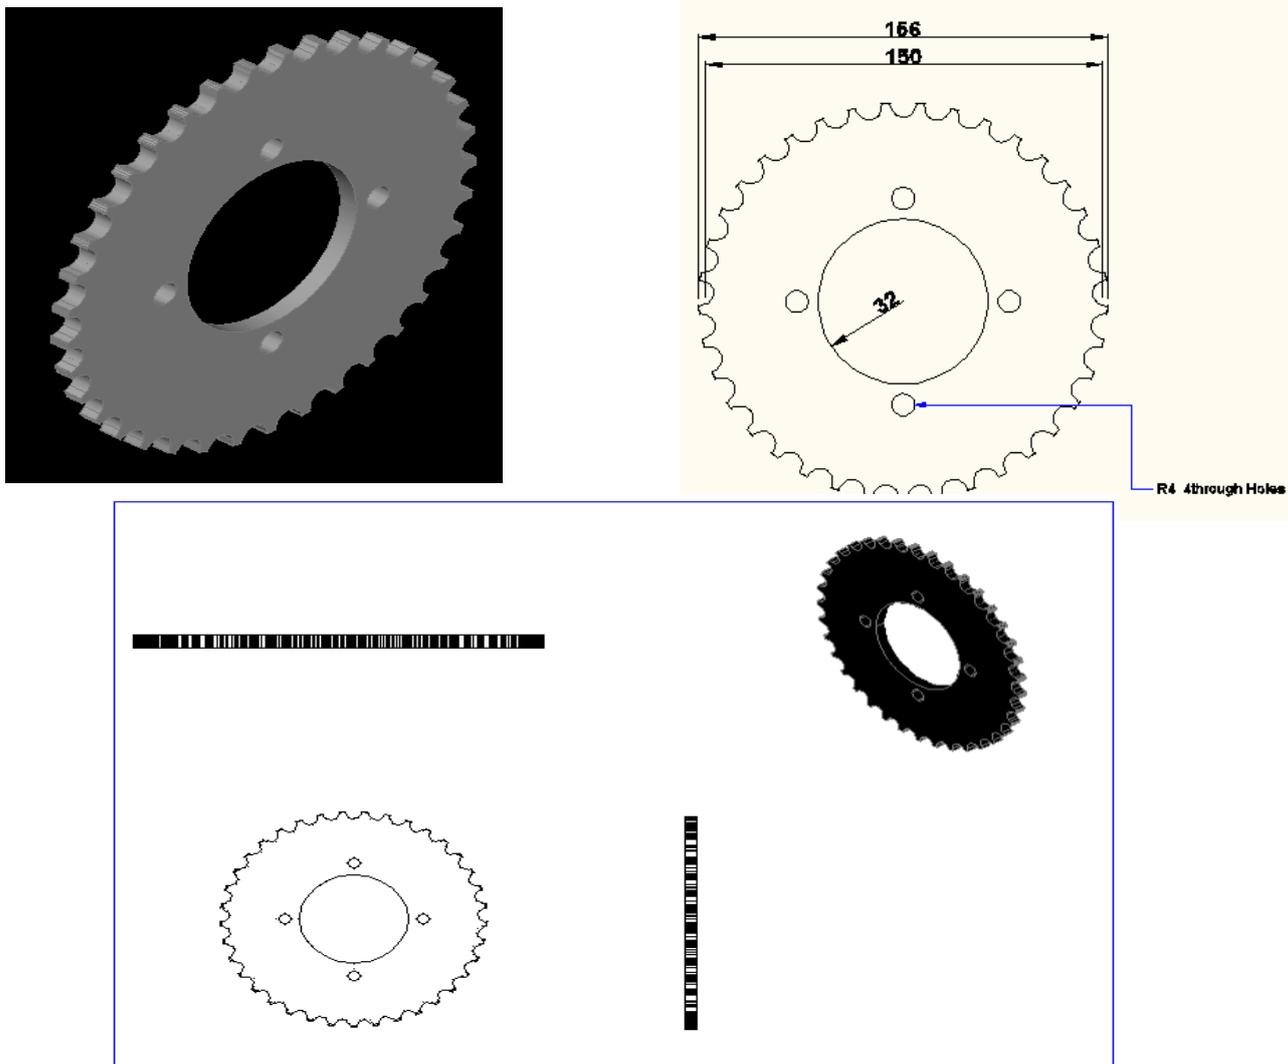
Sprocket 3D standard view drawn with AutoCAD
